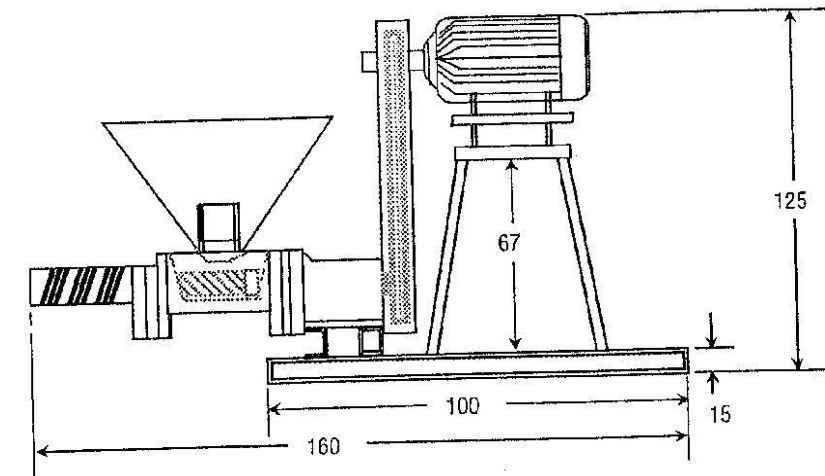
Heated die screw press type briquetting machine (Dimensions are in cm)
